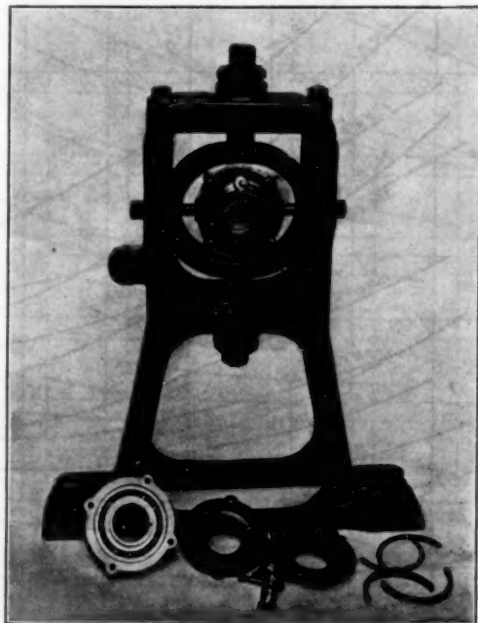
TYPE OF BALL BEARING USED IN TESTS
